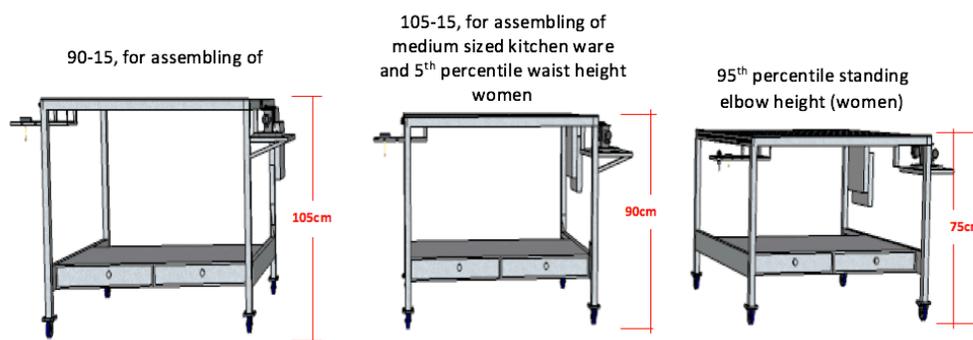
Proposed Large Kitchen Equipment Assembly Workstations (Front View)
